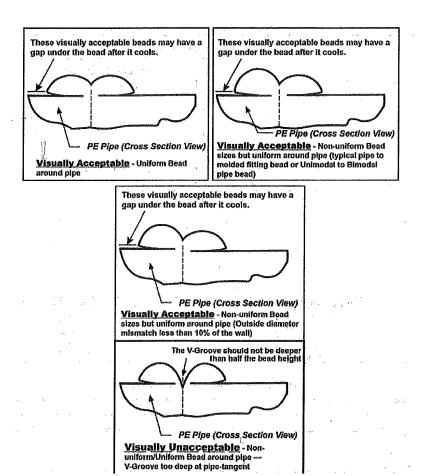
Outside Diameter Butt Fusion Bead Guideline
